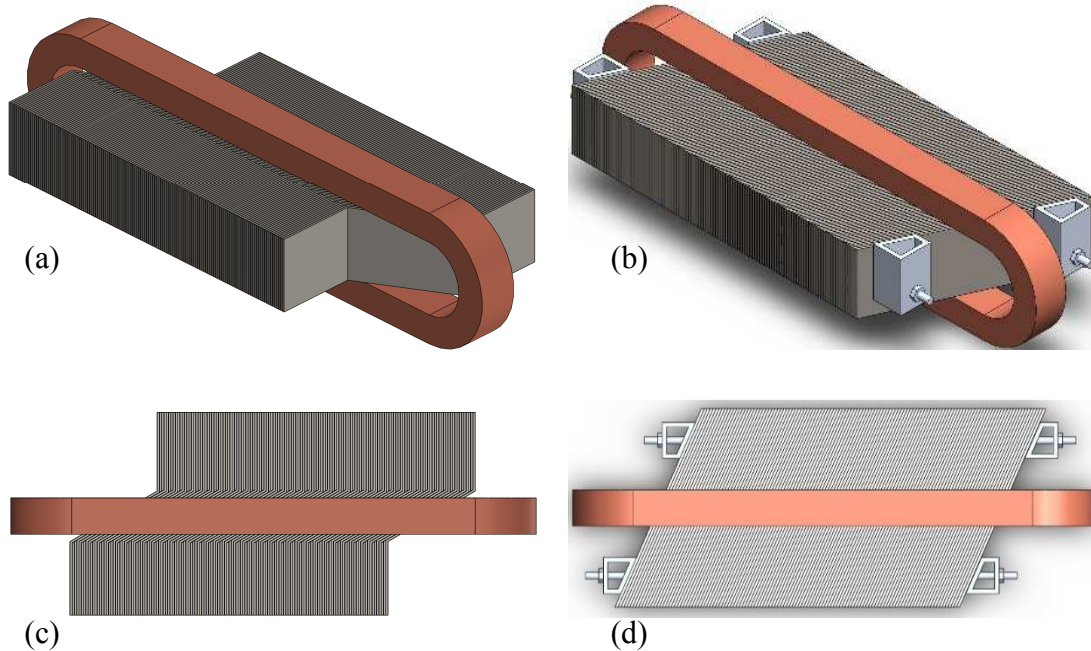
Left: a) ISO & b) Top view formed laminated field core. Right: c) ISO & b) Top view simplified laminated field core
